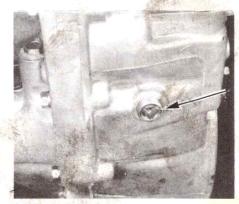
Checking the gearbox oil level (Sec 2)
